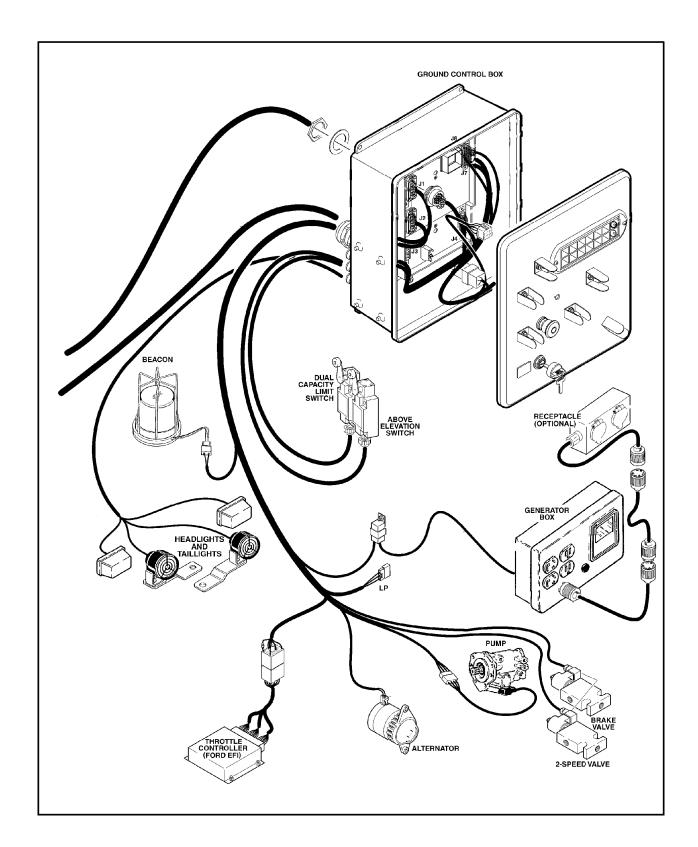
Electrical Components Installation (S/N 62137 to Present)-Sheet 2 of 2
